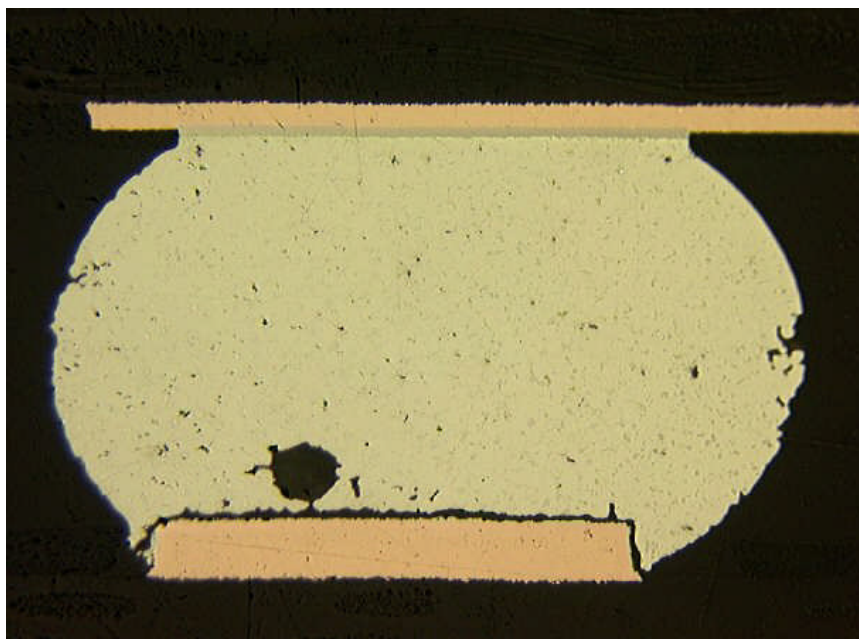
Ball to pad interface fracture in component BGA U2 from Thermal Board 158.
